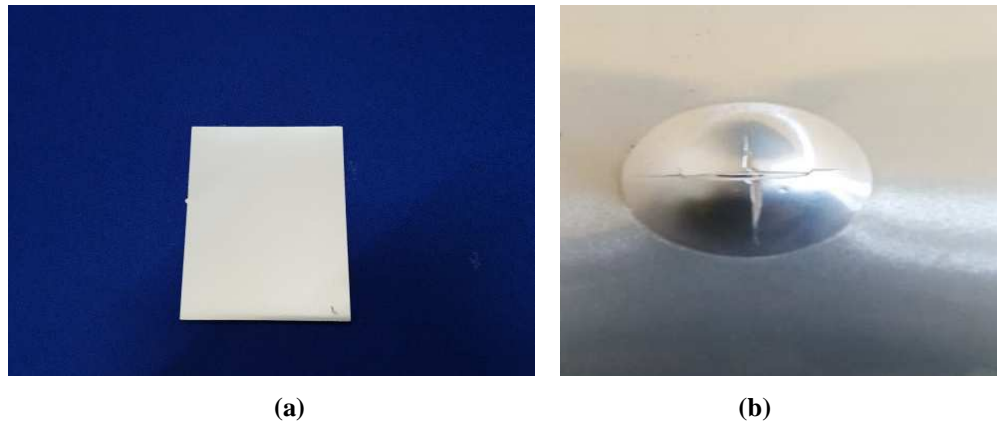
Erichsen Cupping Test Samples (a) Before Testing and (b) After Testing
